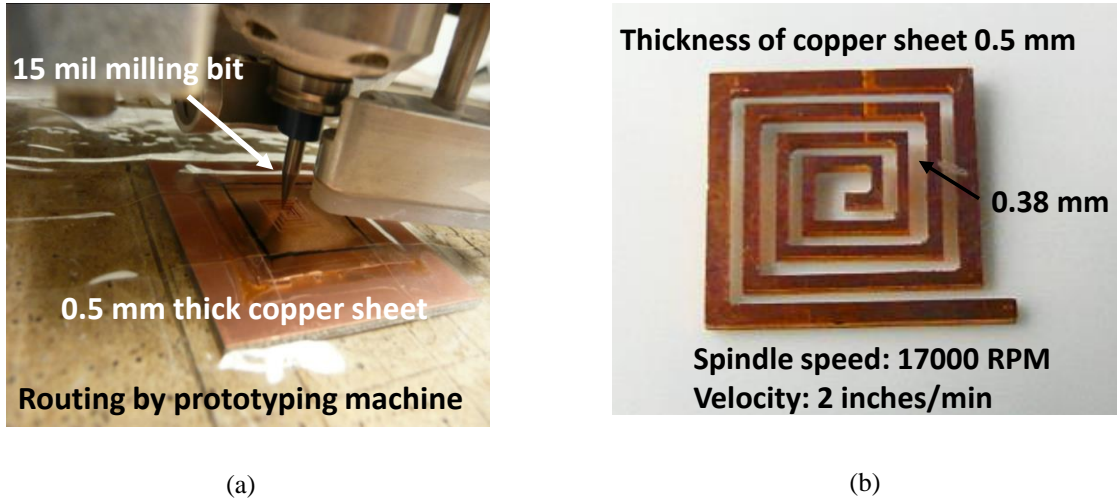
(a) Routing process using T-Tech QC-5000 prototyping machine and 15-mil milling bit and (b) the routed winding half with four turns per layer spirally.
